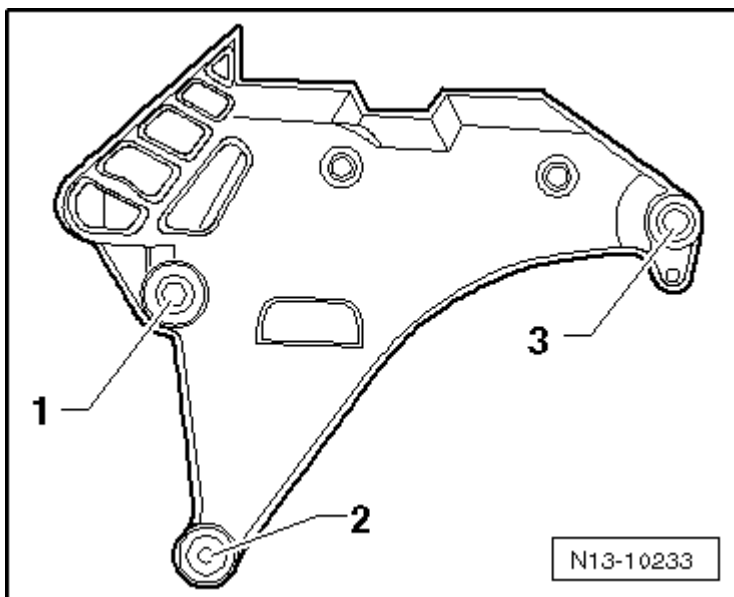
Identifying Engine Mount Bracket to Cylinder Block Bolt Tightening Sequence
